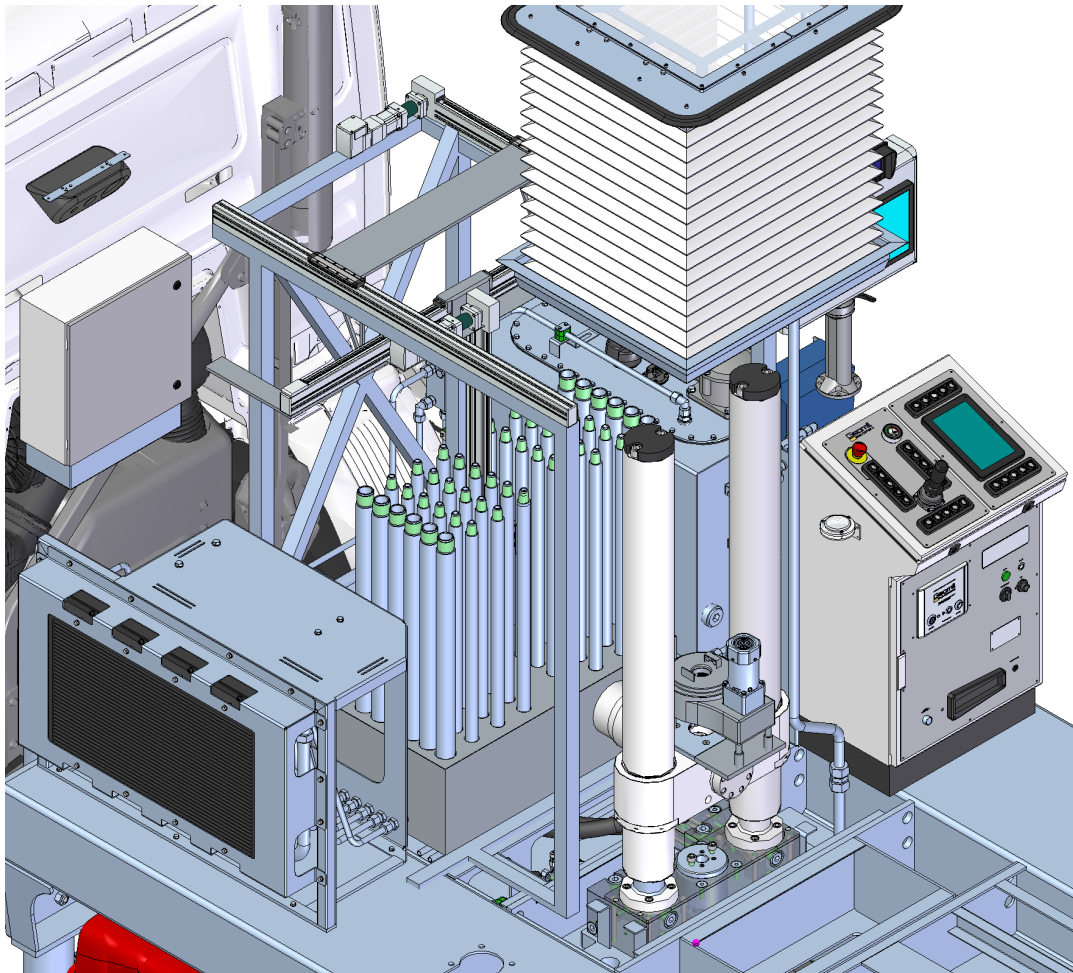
Integration Of The Final Design Inside The Vehicle.
